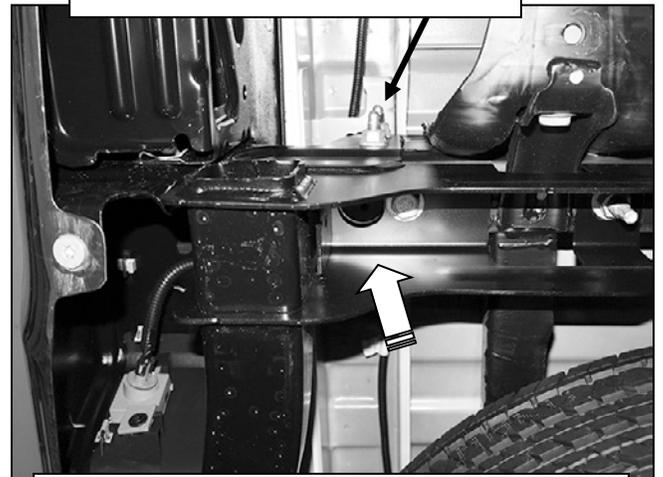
Remove bumper bolts from outside of frame (arrows). Passenger side pictured from below
